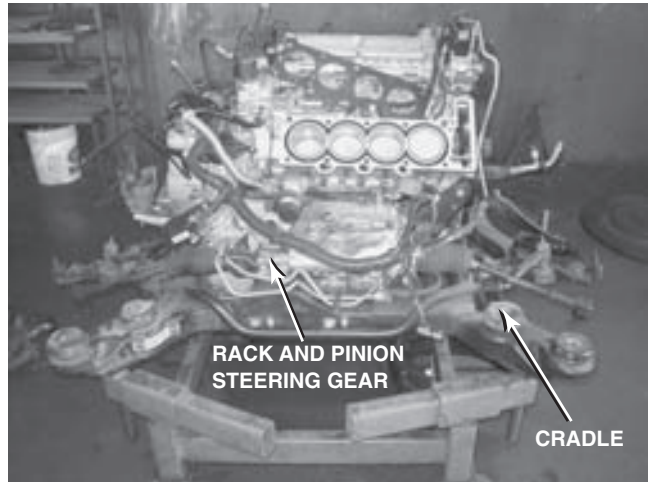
The entire cradle, which included the engine, transaxle, and steering gear, was removed and placed onto a stand. The rear cylinder head has been removed to check for the root cause of a coolant leak.
